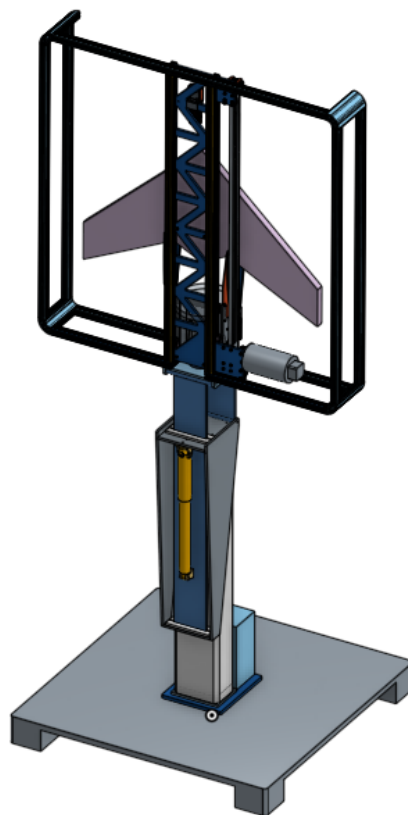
Isometric view of the vertical linear actuator launcher, designed with *Onshape*.
